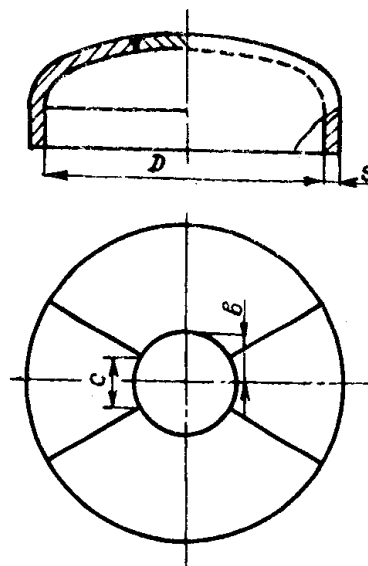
Arrangement of radial and circular welds on the bottom, $b \leq 0,25 D$,
